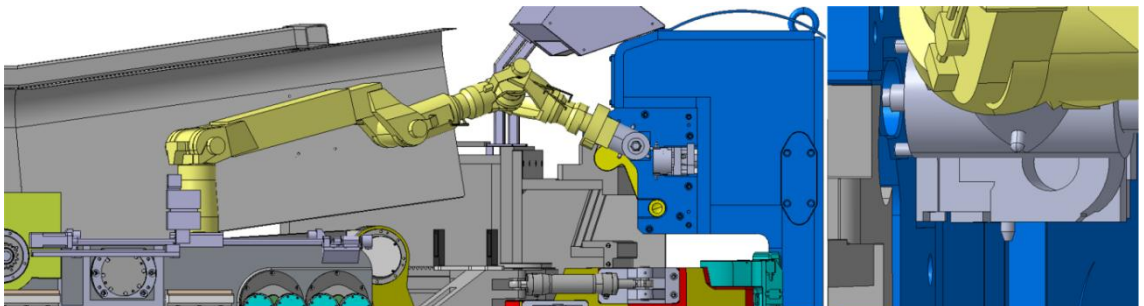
Inserting the pin tool into the pin slot and illustrated camera view
